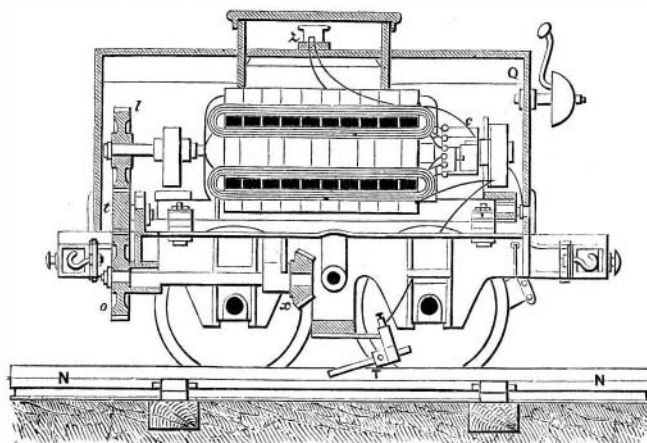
LONGITUDINAL SECTION OF MOTOR.
